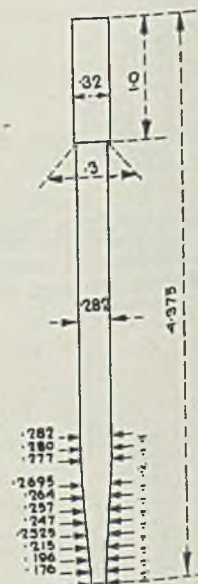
B — First forming punch above. Forming die and ejector shown Fig. 8B, next page
